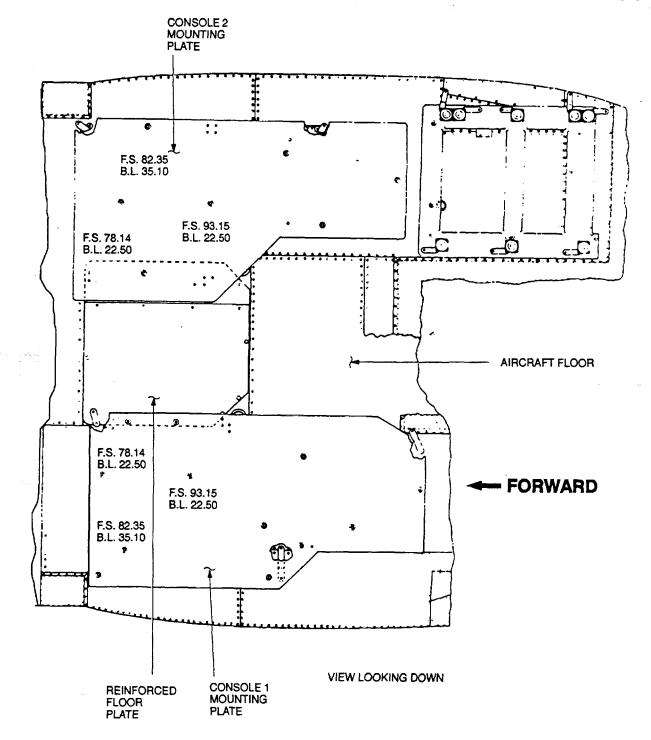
Reinforced Floor Mounting Plates and Base Assembly
